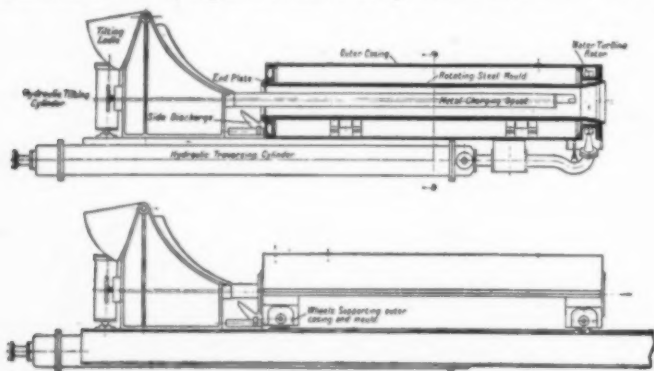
Stanton Lavaud Cast Iron Pipe Spinning Machine.
